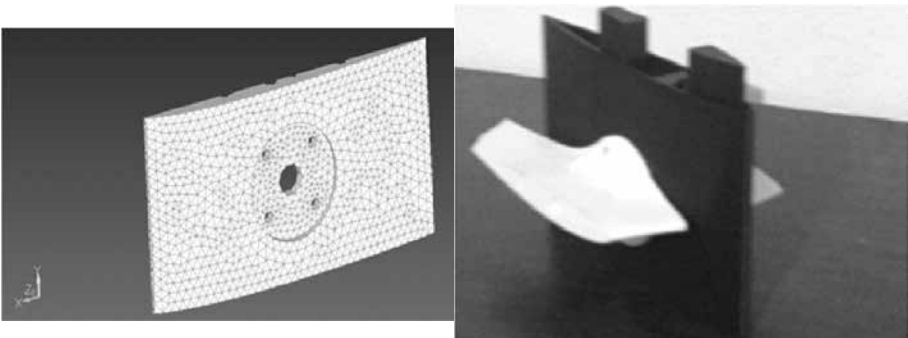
3D printed housing: FEMAP model (left), manufactured part (right)
